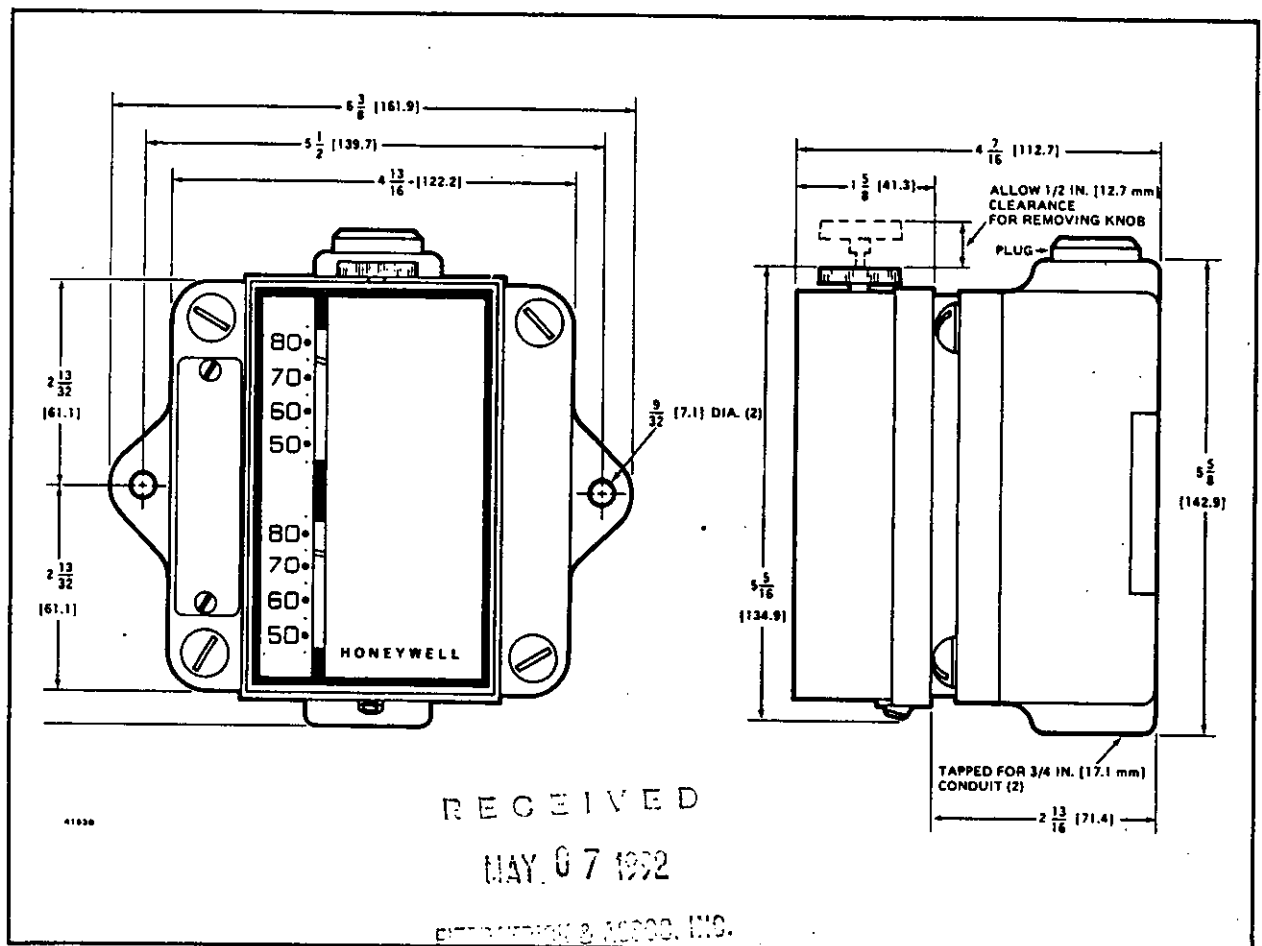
MOUNTING DIMENSIONS FOR T6051B IN INCHES [MILLIMETRES SHOWN IN BRACKETS].
